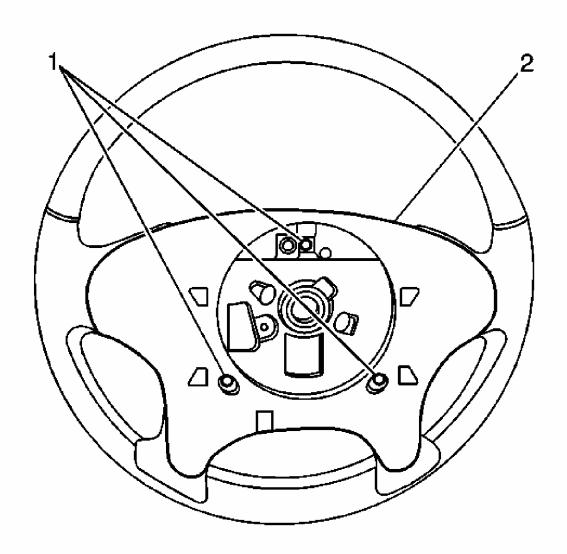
View of Steering Wheel Bezel & Retaining Screws Courtesy of GENERAL MOTORS CORP.
